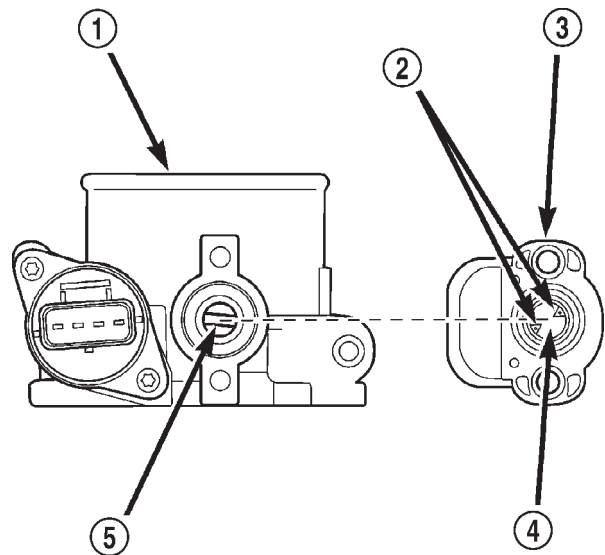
TPS Mounting Bolts—4.7L V-8 Engine
